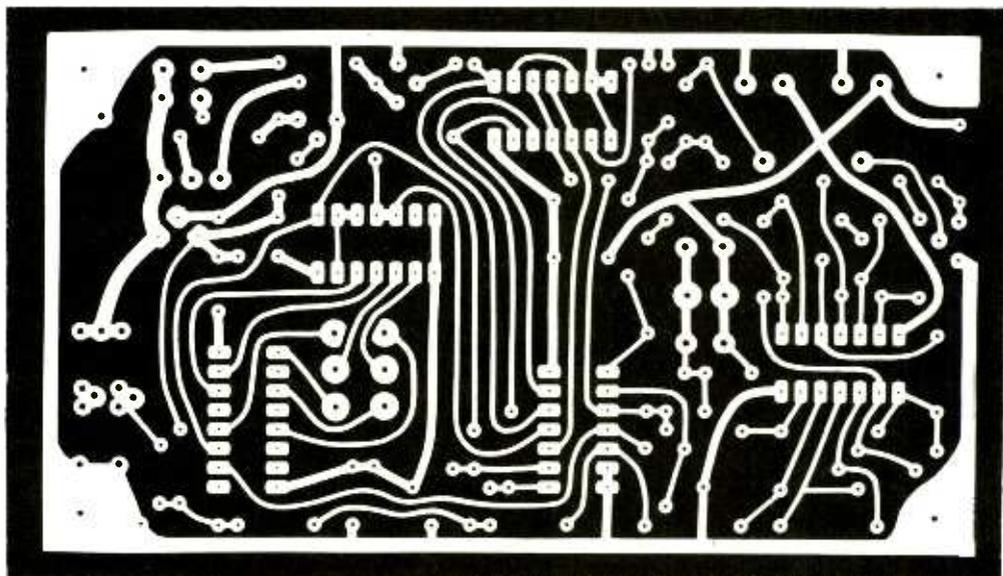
Full-size etching and drilling guide for the receiver pc board.
